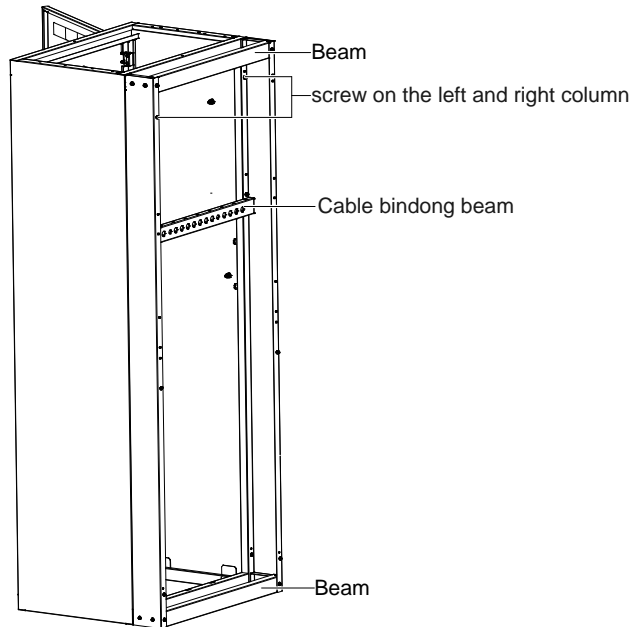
Rear cover plate installation for bottom cabling method (1)
